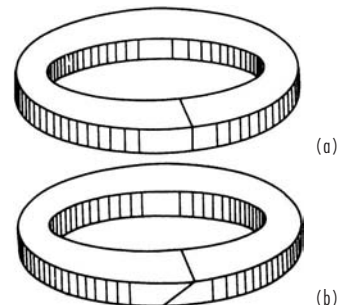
Butt (a) and skive (b) joints for compression packing rings.
